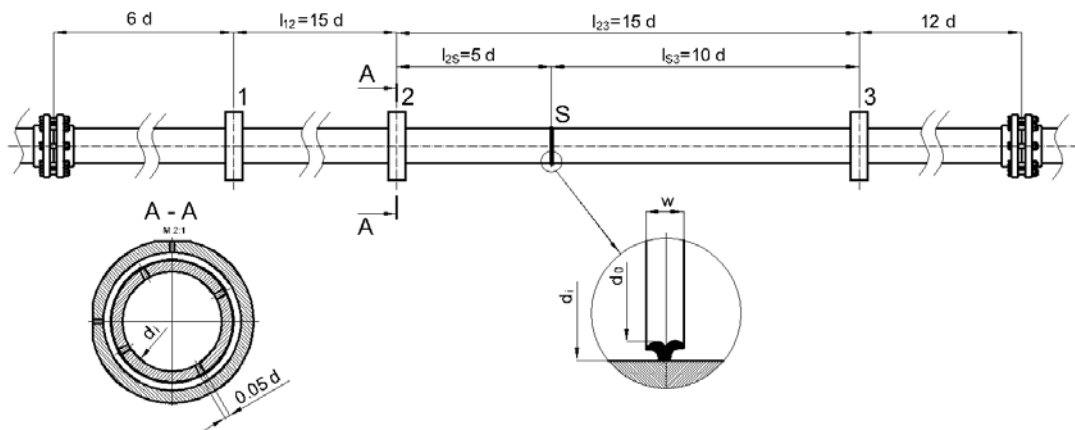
Arrangement of test section with detail of pressure measuring connections
